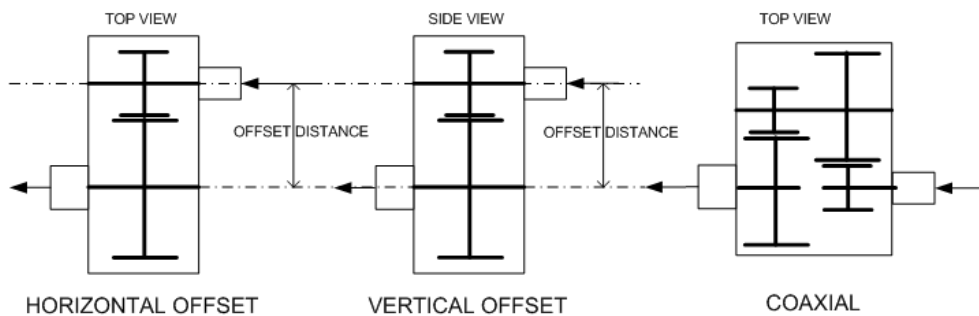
Schematic view of horizontally, vertically and coaxial offset gears
